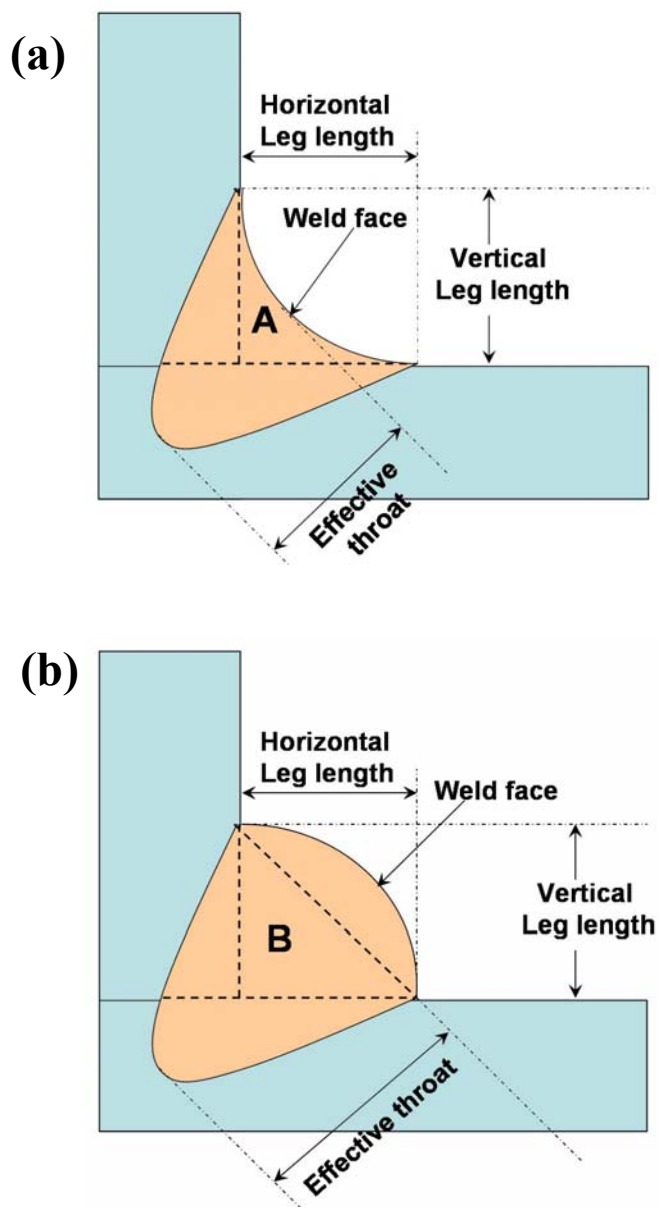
Parts of a fillet weld. Weld A is concave and the weld size is smaller than weld B, which is a convex weld. Notice that the leg-sizes in weld A and B are the same, but the weld size is larger with a straight or slightly convex bead.
